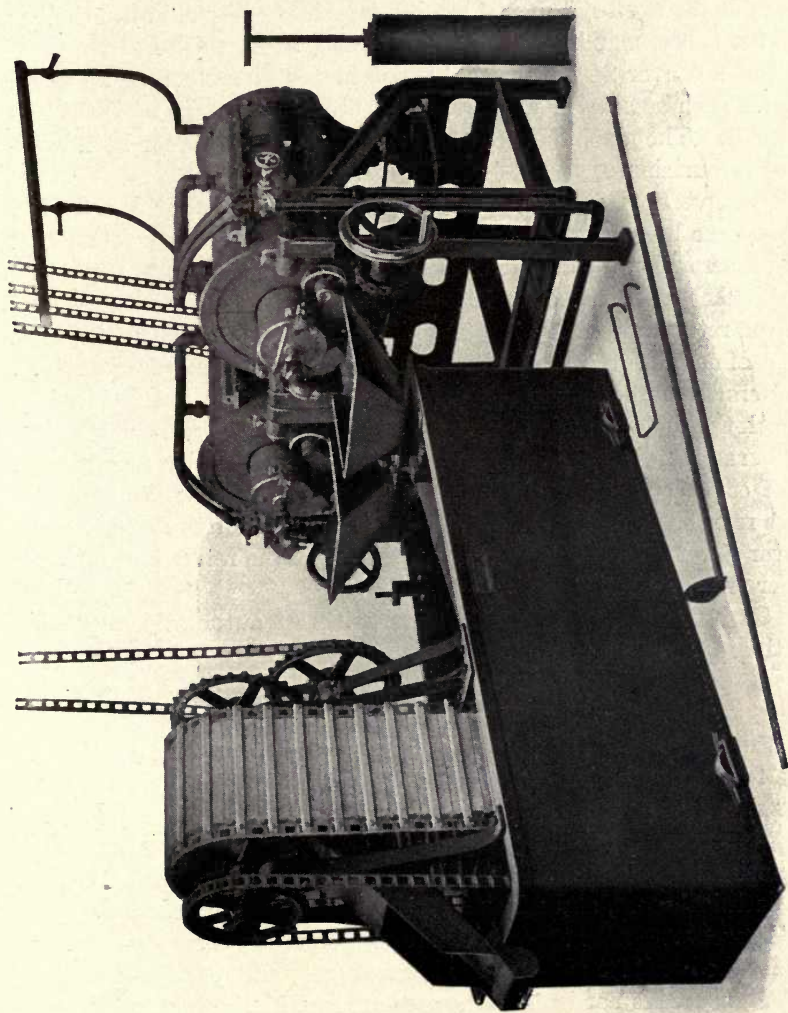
Carburizing Machines Connected with Automatic Quenching Bath. (American Gas Furnace Co.)
